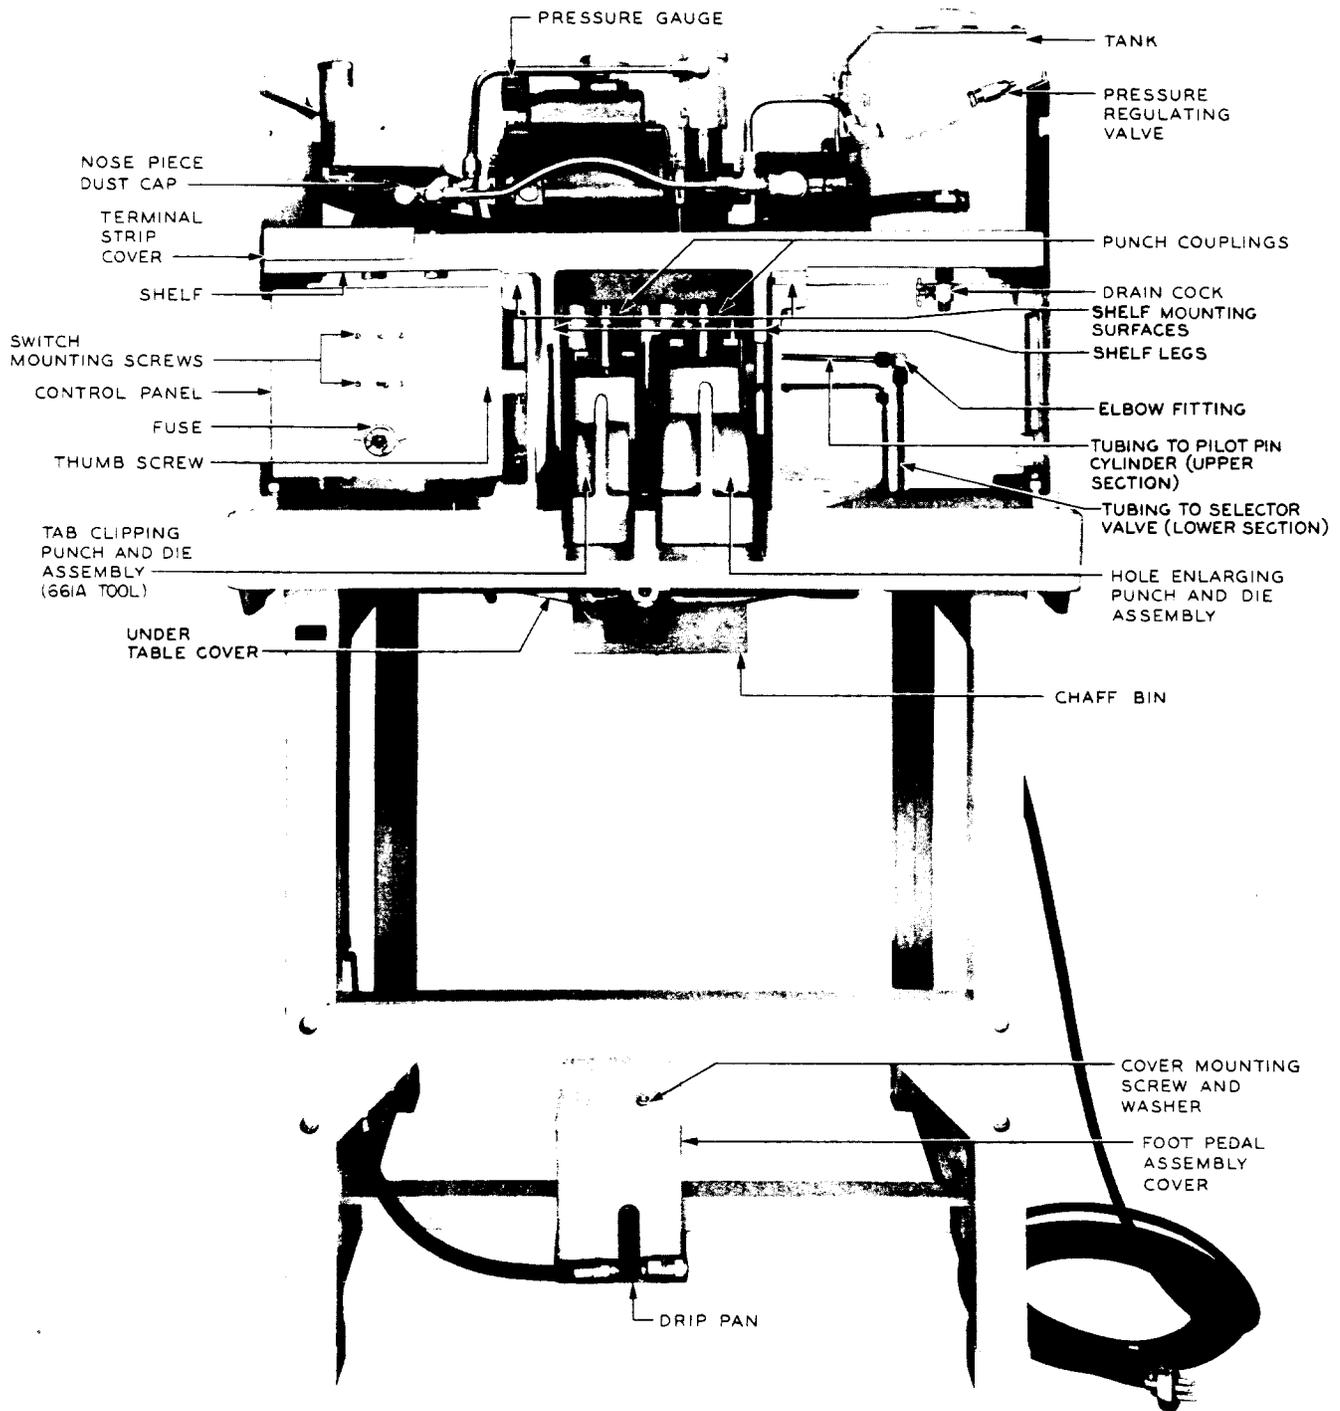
659A and 659D Tools (rear view — covers removed)
